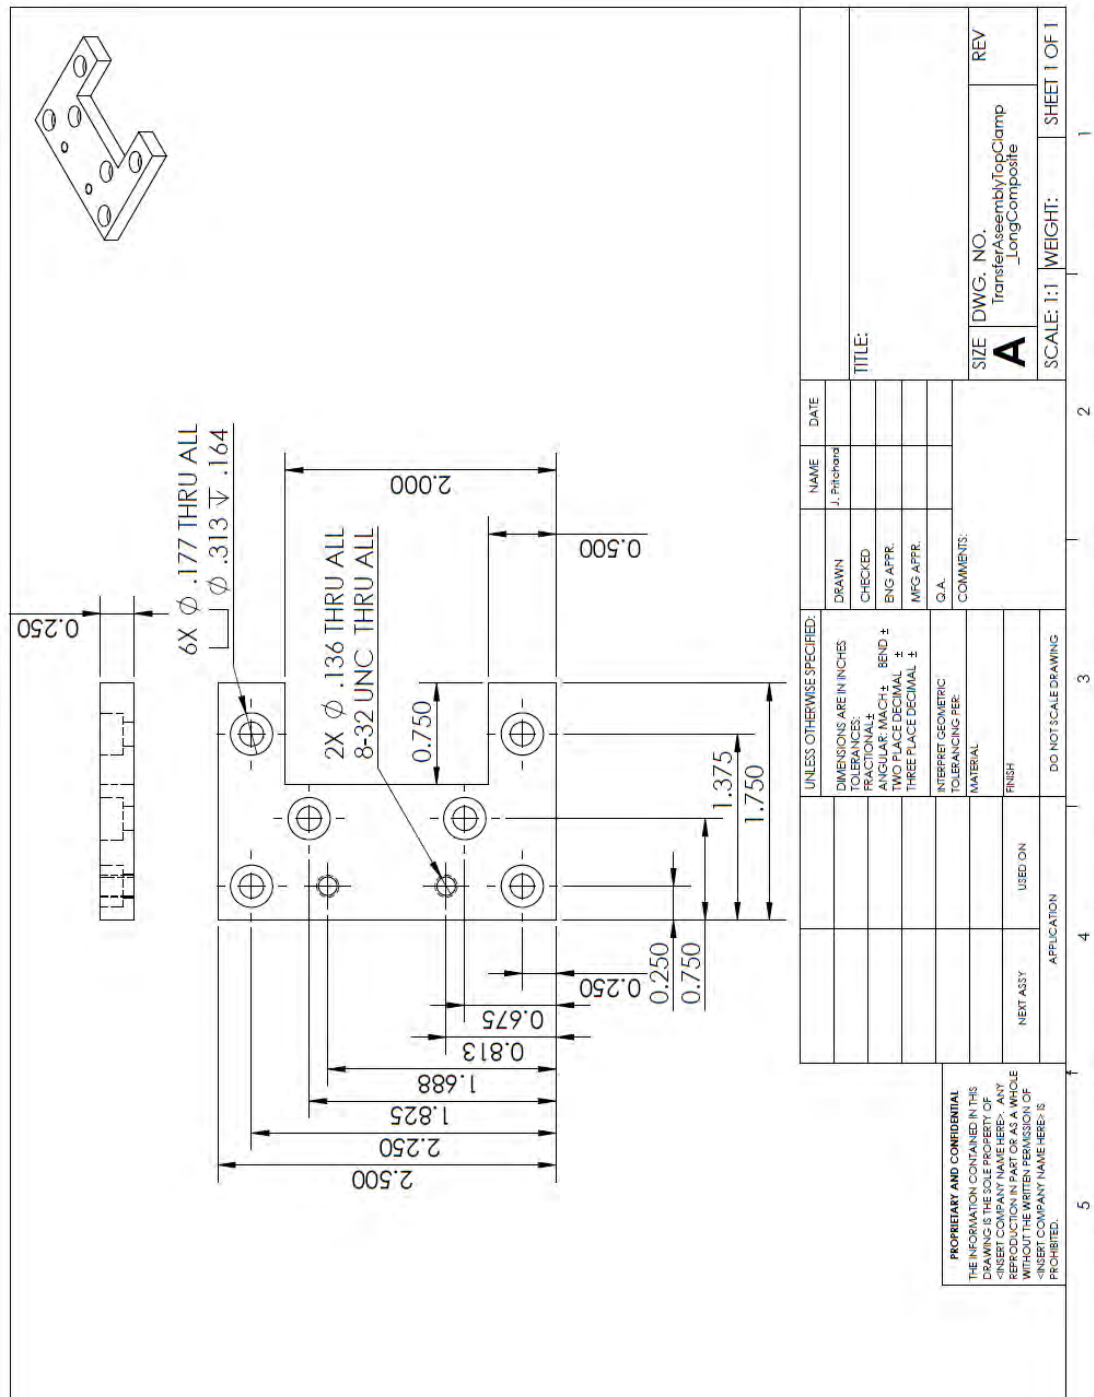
Dimensional drawing of upper ribbon clamp used in large geometry transfer assembly.
